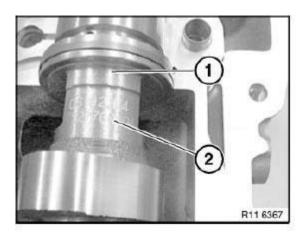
Identifying Part Numbers And Exhaust Camshafts Courtesy of BMW OF NORTH AMERICA, INC.
